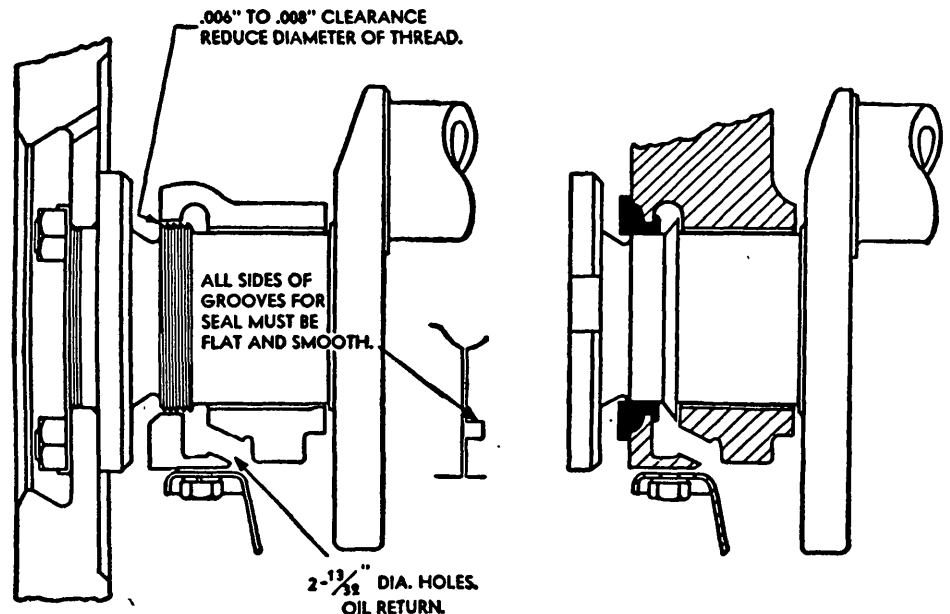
Crankshaft rear oil seals n S ries 20, 60.
